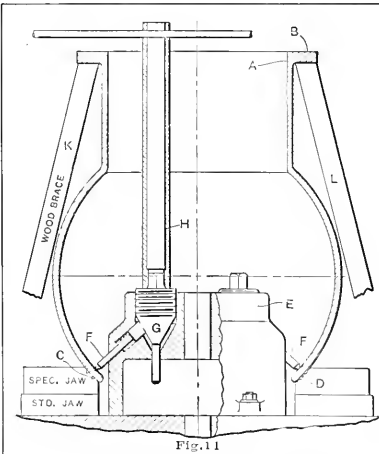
Vertical Boring Mill Fixture for holding Large Ball Joint
